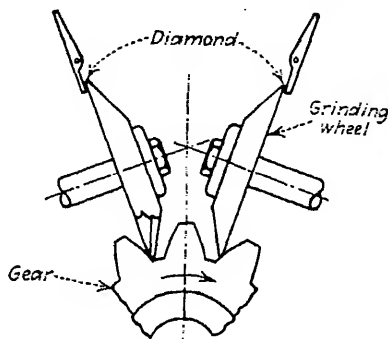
Automatic adjustment for wear on grinder wheels.
